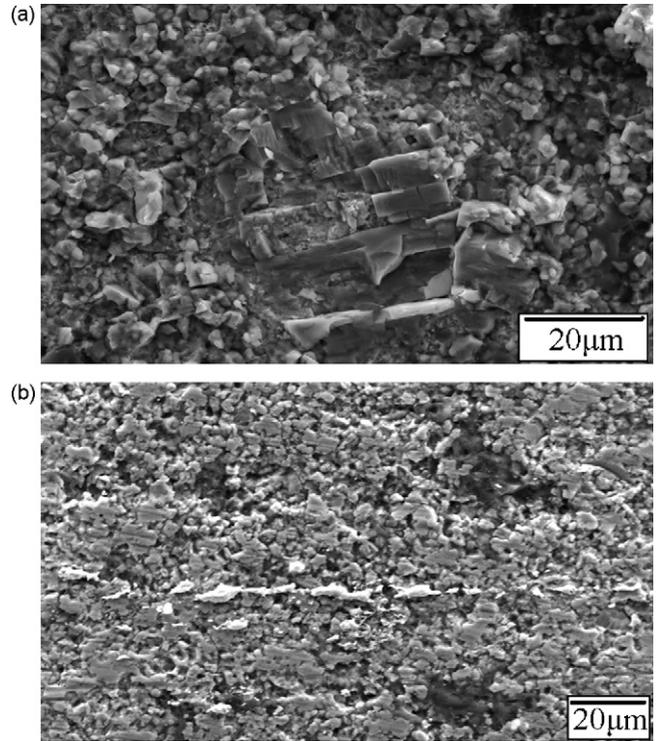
Fractographs of ZnS-SiO₂/Cu joint with Sn_{3.5}Ag₄Ti(Ce, Ga) active solder after tensile testing: (a) the copper specimen side; (b) the ZnS-SiO₂ specimen side.
